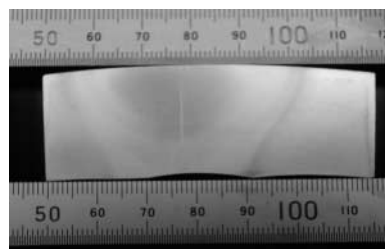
ERW weld seam of 1.000 inch thick pipe (Nital etched)
